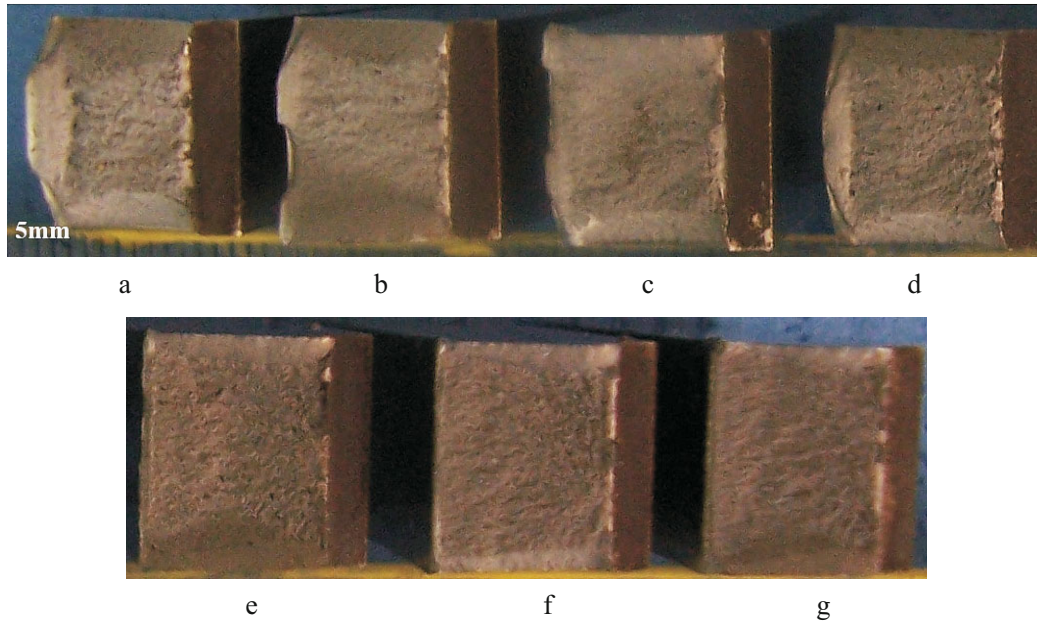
Macrographs of the impact fracture surfaces of 3Mn-Si-Ni steel at different temperatures: (a) 20°C; (b) 0°C; (c) -20°C; (d) -50°C; (e) -60°C; (f) -70°C; (g) -80°C.
